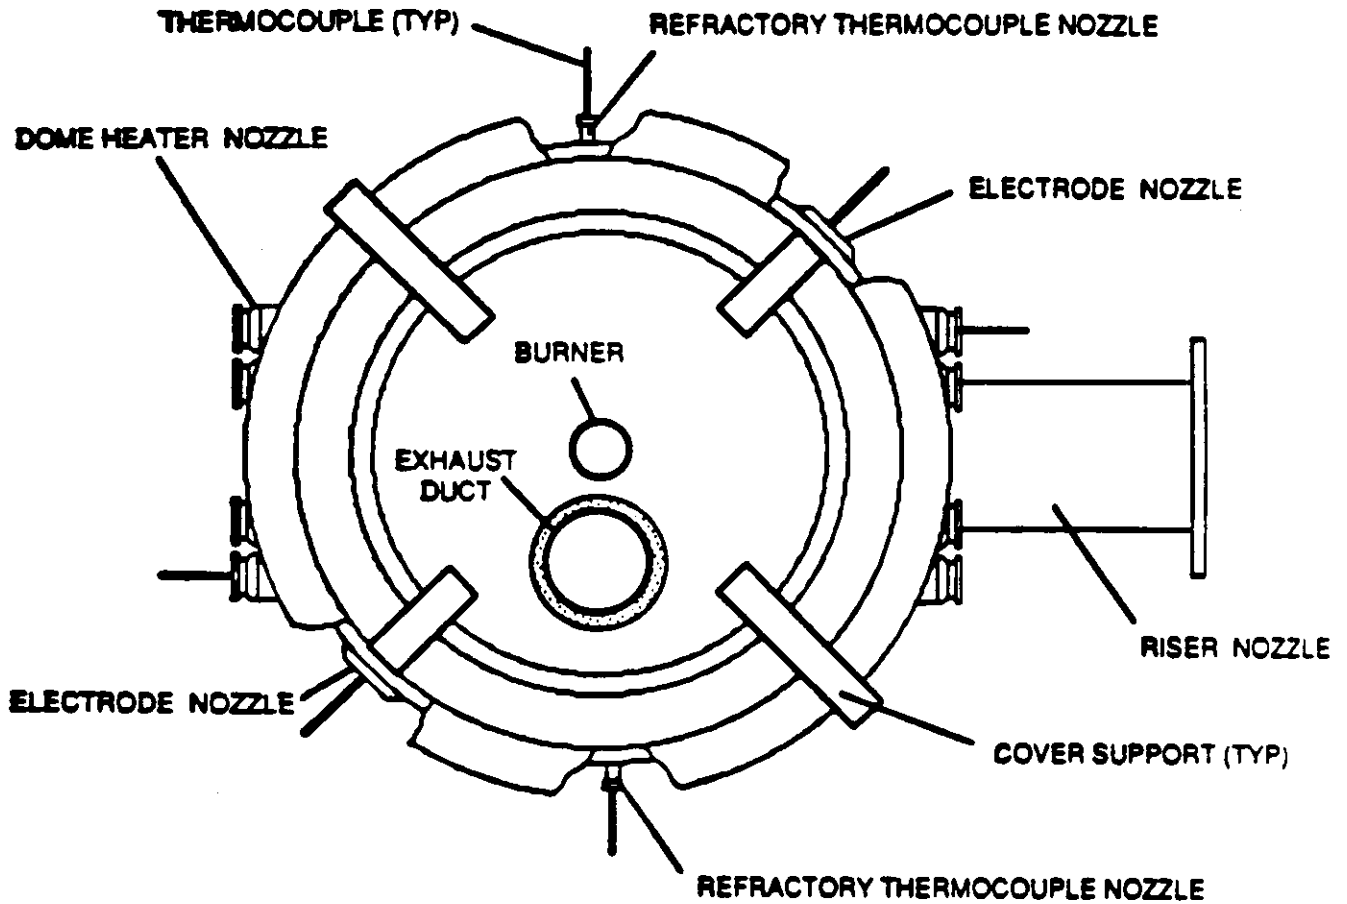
REFRACTORY DRY-OUT (PLAN VIEW)
